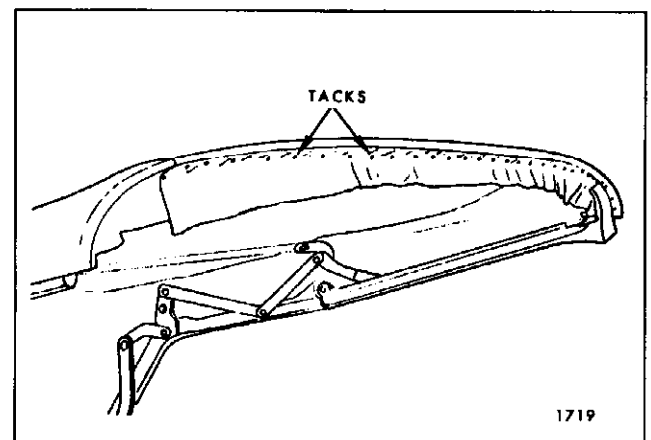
Installation Of Top Material To Front Roof Rail
